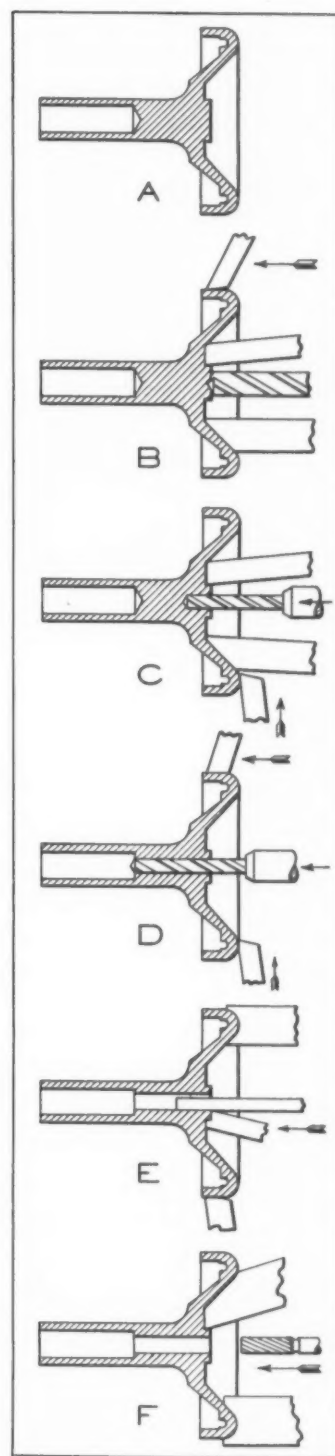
Tooling Supplied on Automatic Chucking Machine Illustrated in Figs. 1 and 2, for Machining the Bowl-shaped End of a Milk Separator Part
